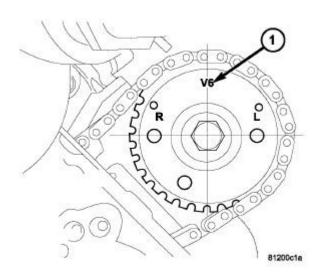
CAMSHAFT SPROCKET V6 MARKS Courtesy of CHRYSLER LLC
